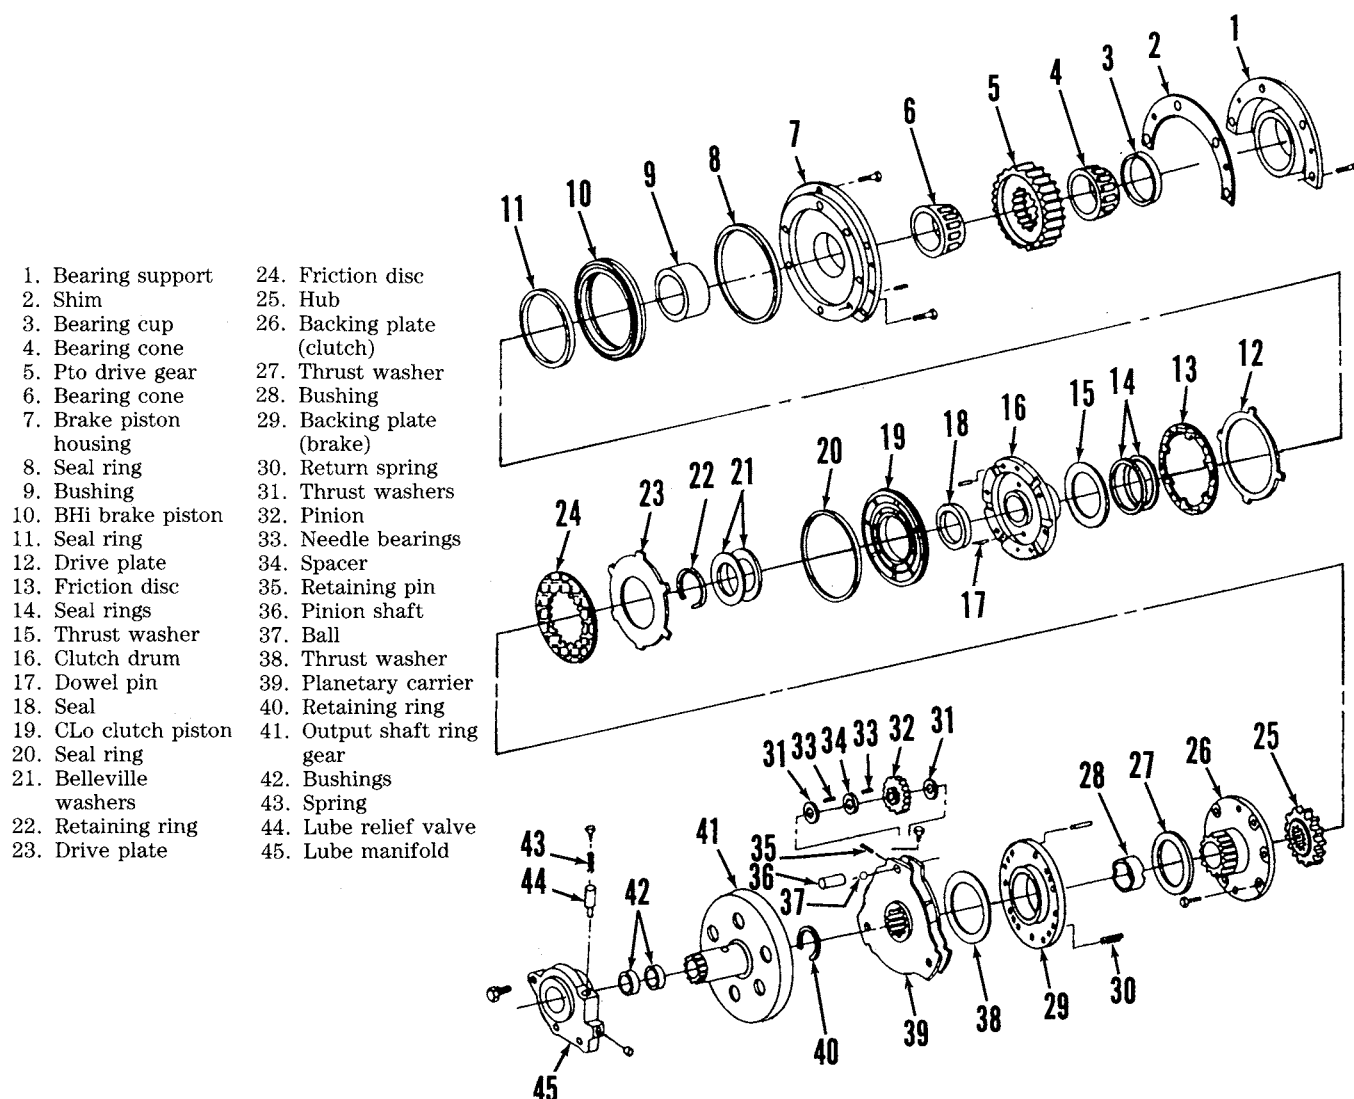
Exploded view of input planetary, BHi brake and CLo clutch used on Power Shift models.
